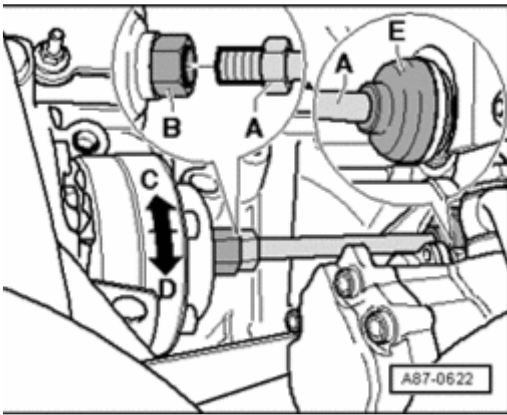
Using Open-Ended Wrench To Hold Compressor Drive Shaft In Position And Turning Compressor Drive Unit
